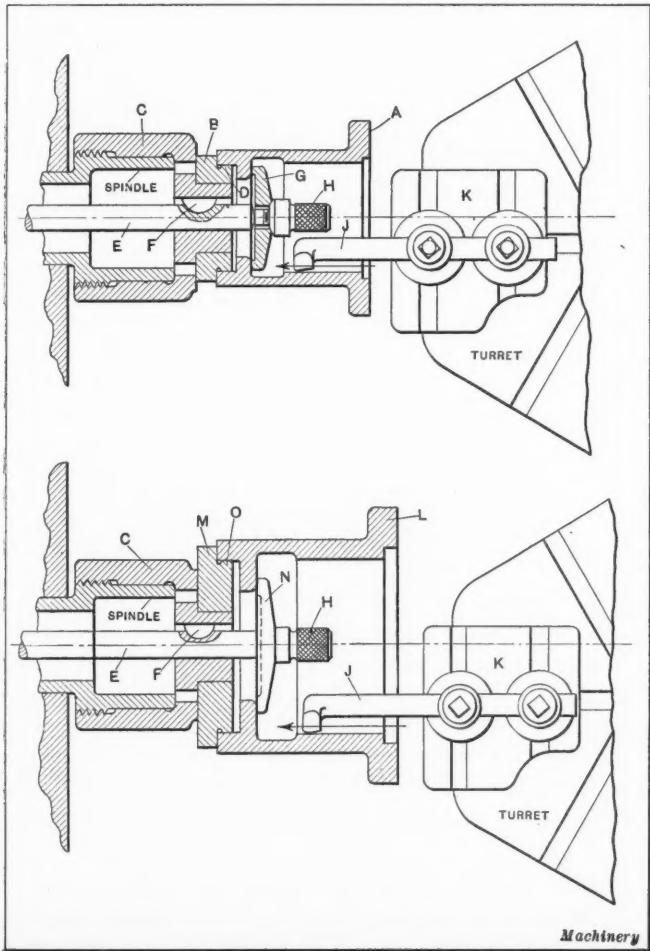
Fixture for boring Pot Castings on Horizontal Turret Lathe; Different Clamping Collars are provided for Different Sizes of Work
